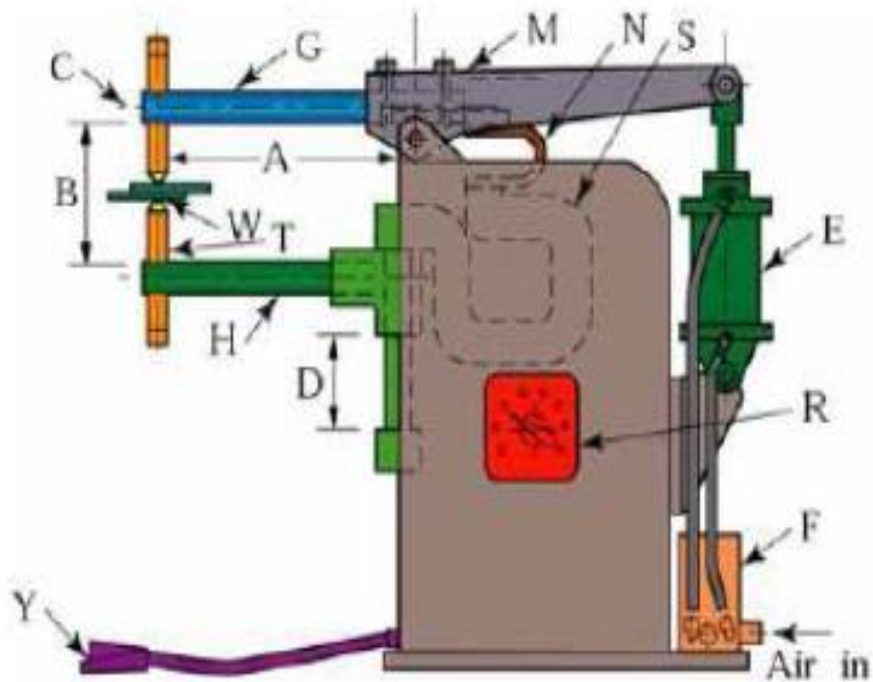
Resistance spot welding machine and accessories.
